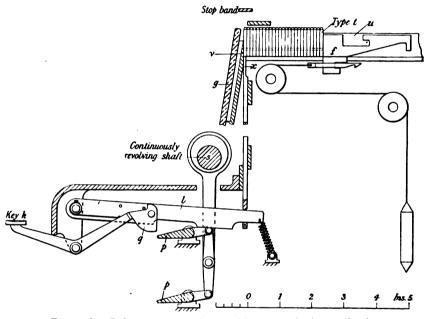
Pulsometer composing machine ; type-freeing mechanism.
